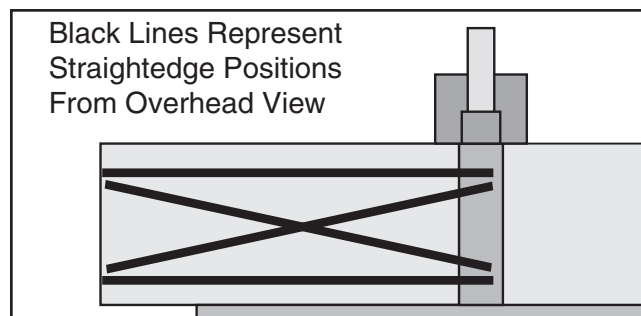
Straightedge positions for verifying if outfeed table is parallel with cutterhead.
